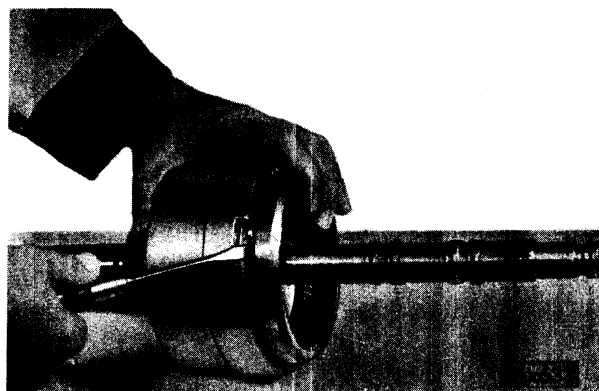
Removal and Installation of Output Shaft Drive Housing Snap Ring
